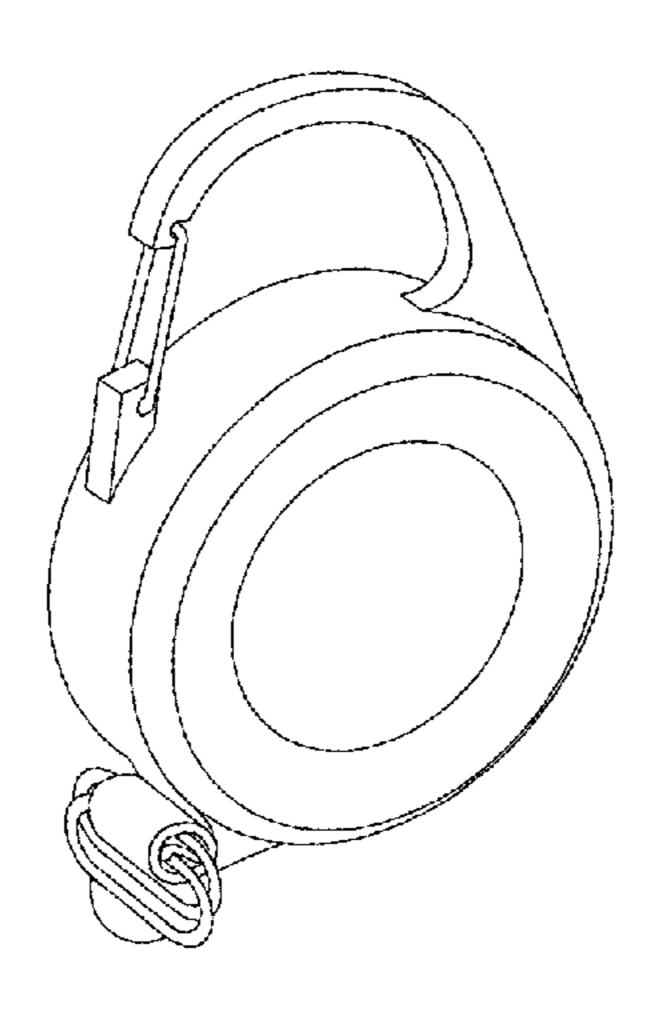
is a left side elevation view showing the leash attachment in its fully retracted position;
